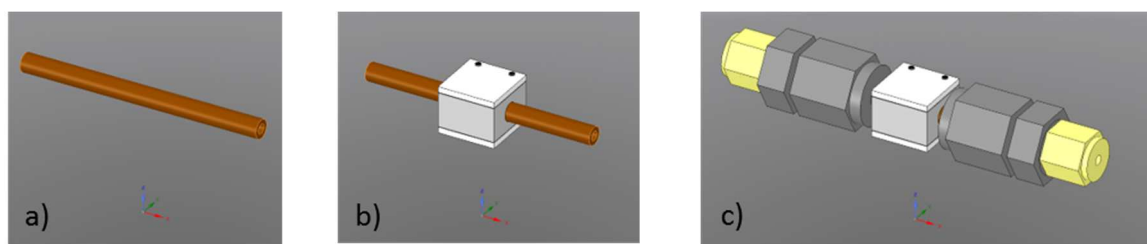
μPA 3D design: (a) copper tube, (b) copper tube, aluminium cube and ceramic resistances and (c) whole assembly including the fluidic connections.
